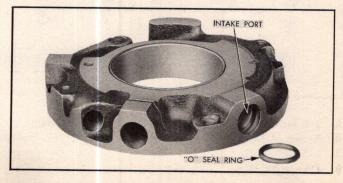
Front Pump Intake Pipe "O" Seal Ring
